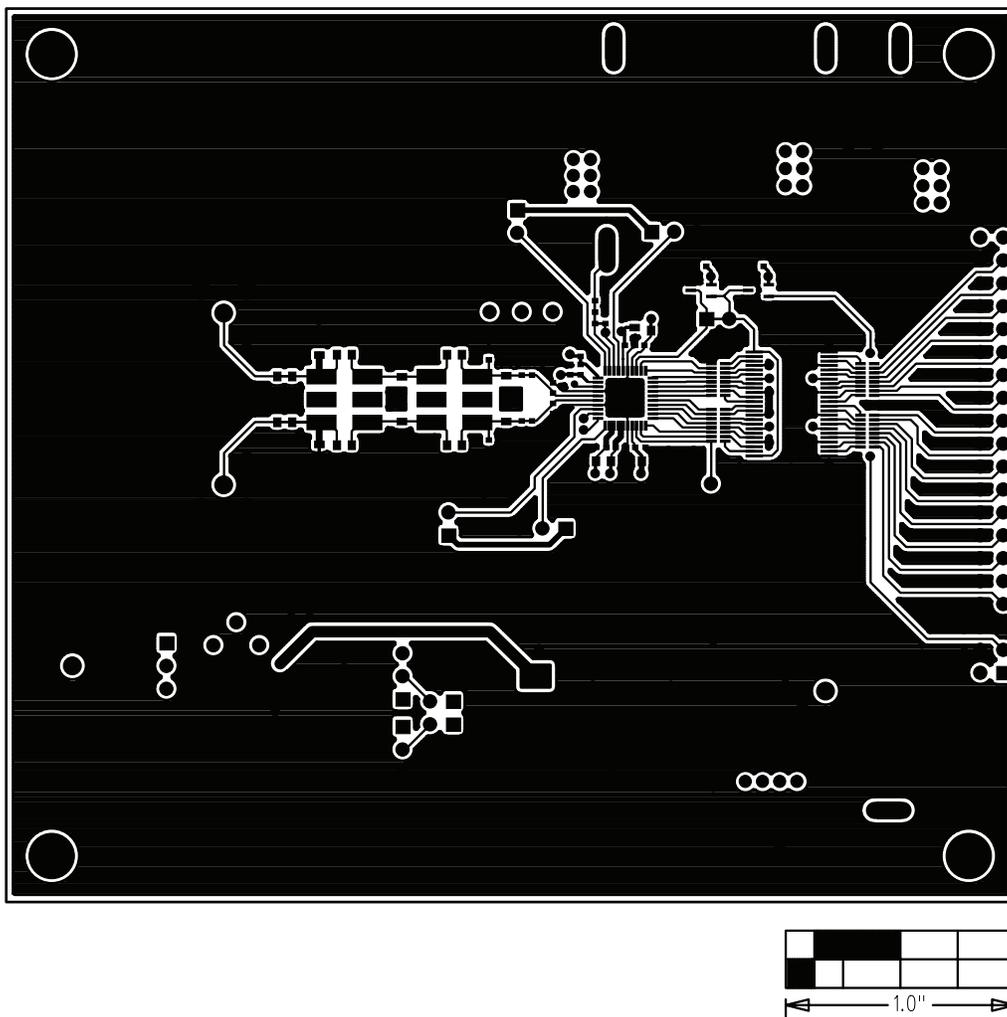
MAX12555 EV Kit PC Board Layout—Component Side
